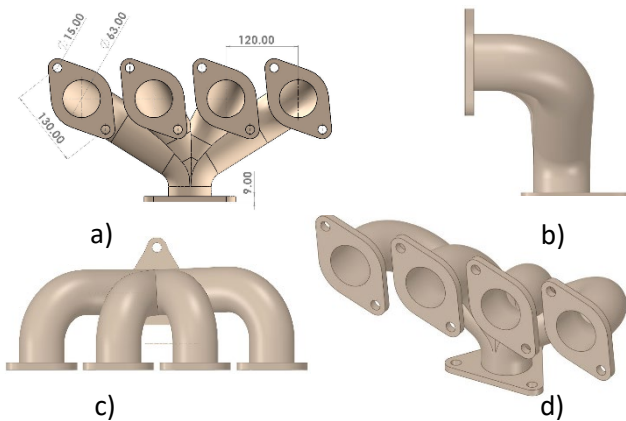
Exhaust manifold a) front, b) side, c) top, d) perspective view
